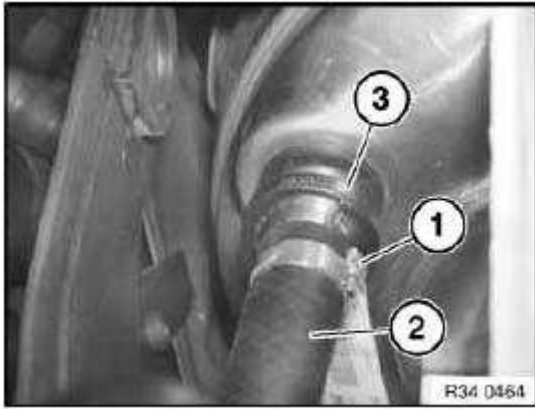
Clip, Vacuum Hose And Non-Return Valve
